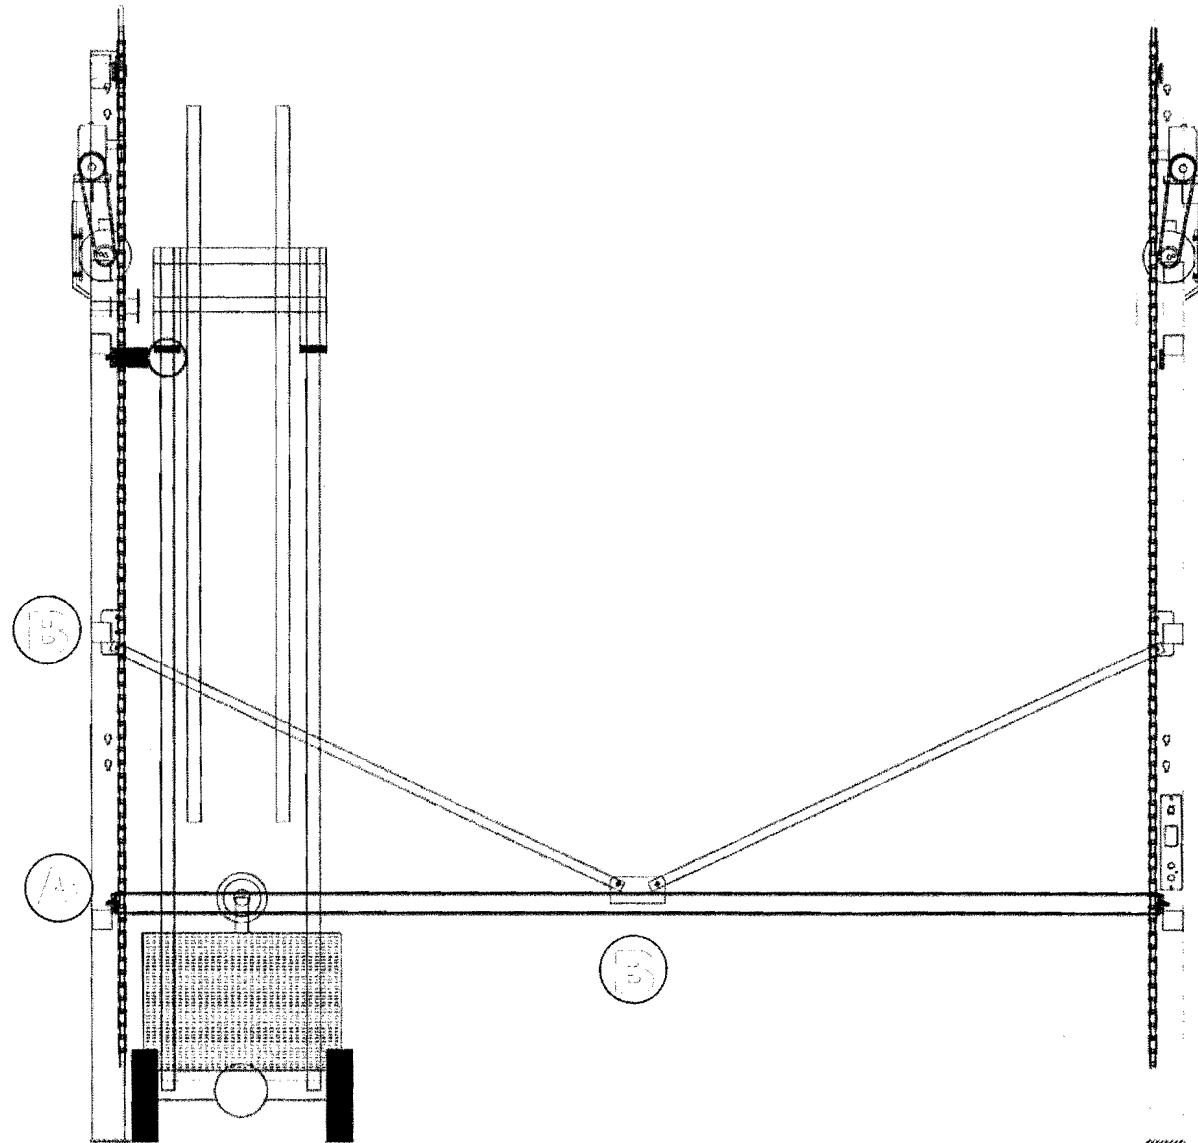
REMOVE THE FORKLIFT AND SET UP PIPE, INSTALL THE TOP CROSS BRACE
